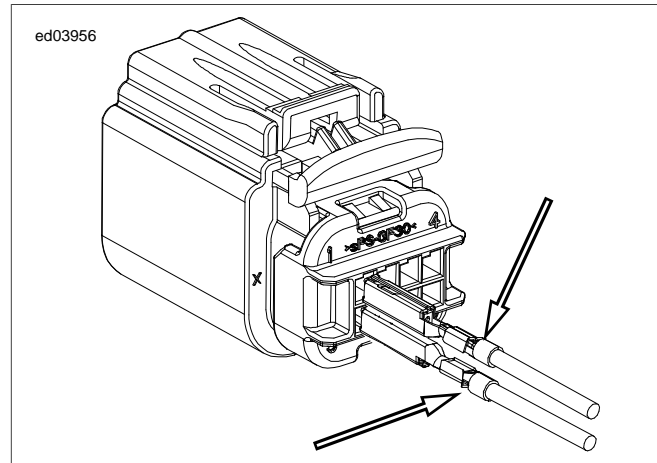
Socket Terminal Orientation: Crimp Open Side
